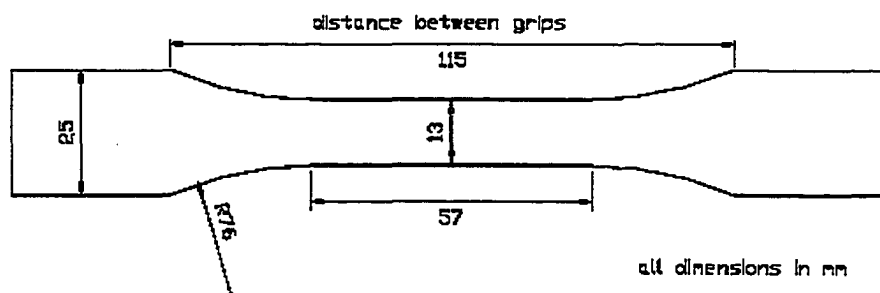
Shape and dimensions of an ASTM D638 Type 1 test specimen.
